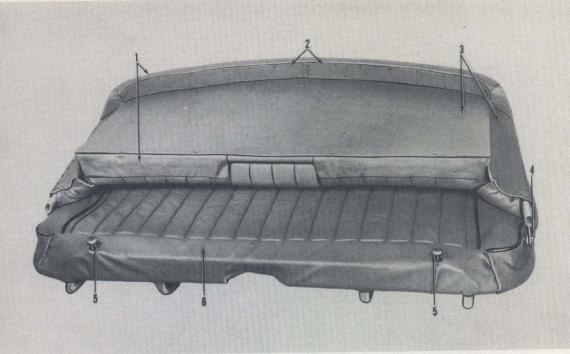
A-Seat Cushion and Back Assembly-Rear View.
